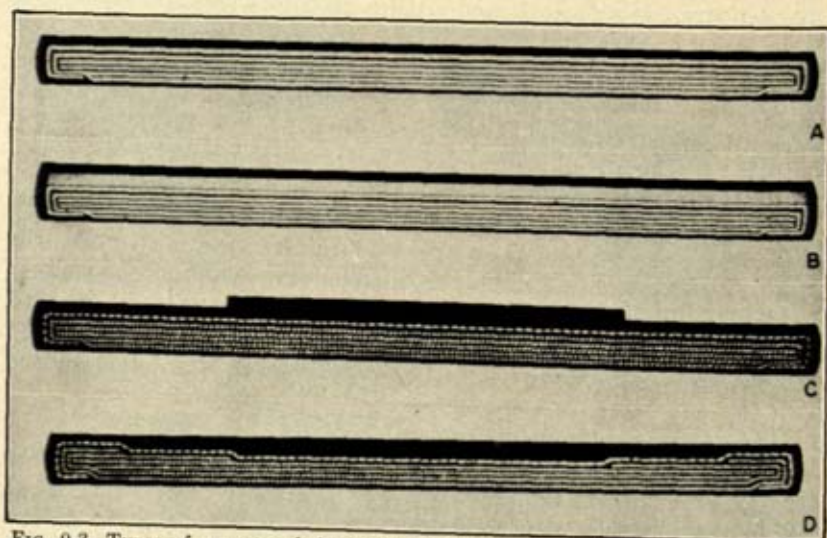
Types of conveyor-belt construction: (A) standard; (B) shock pad; (C) stepped pad; (D) stepped ply. (Hewitt-Robins, Inc.)
